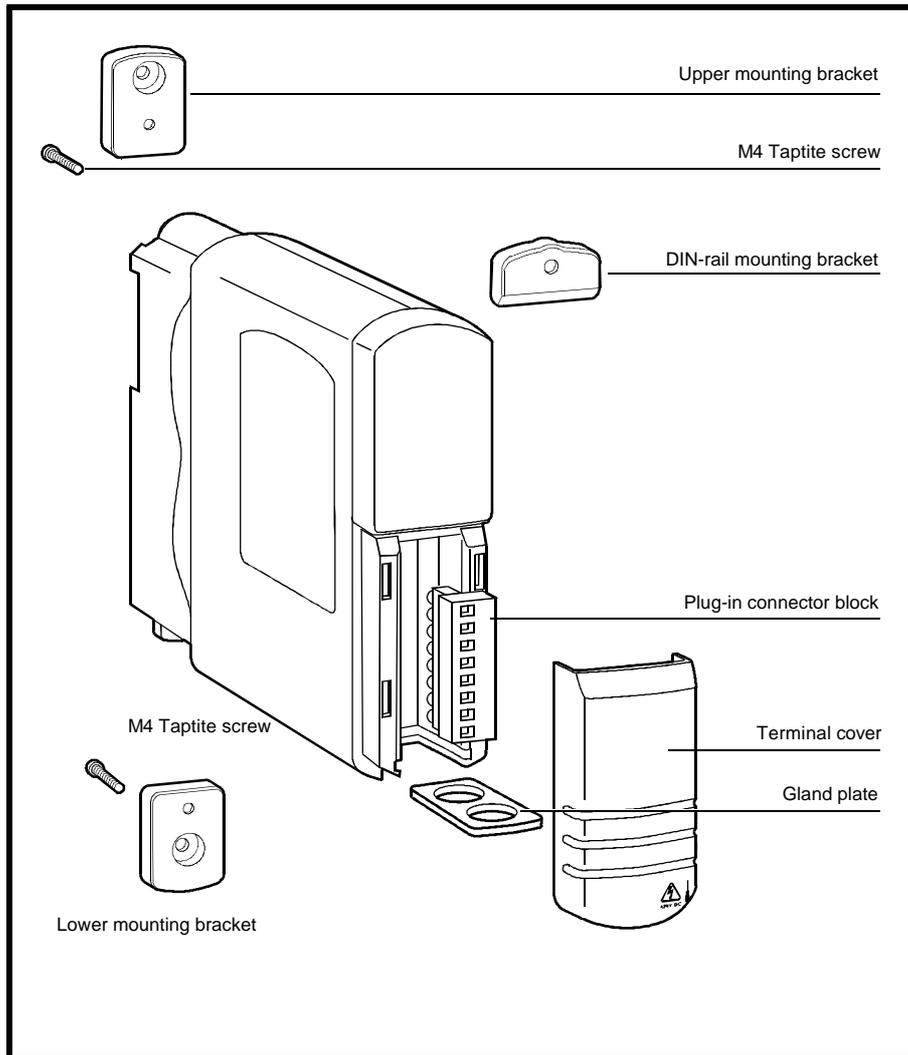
RFI Filter parts supplied showing terminal chamber
